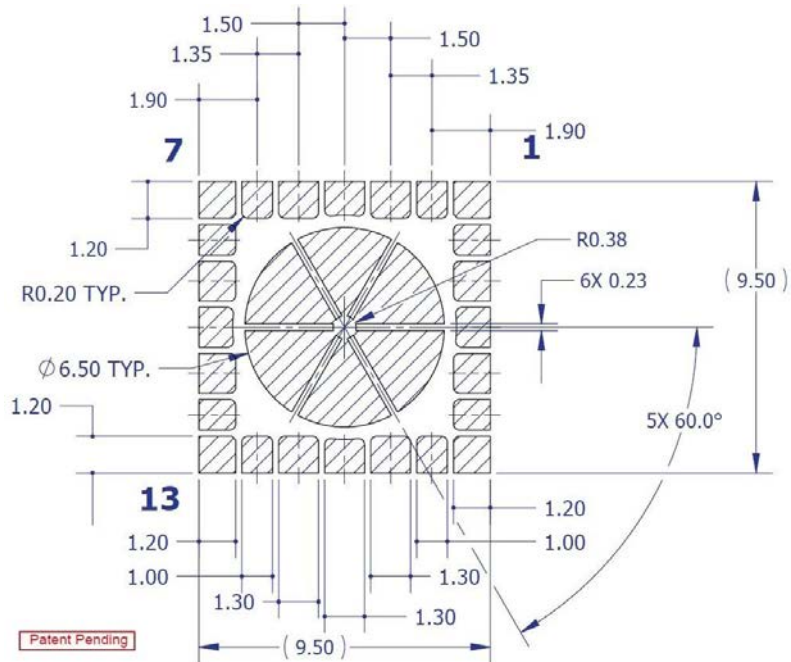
Recommended solder pad layout for anode, cathode, and thermal pad.
